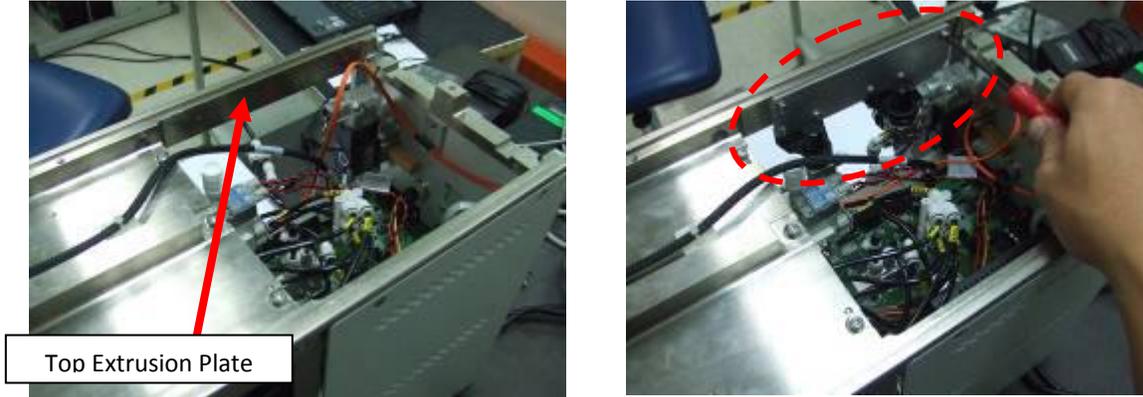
Installing the Pressure regulator mounting sub-assembly from Step 12 onto top extrusion plate
